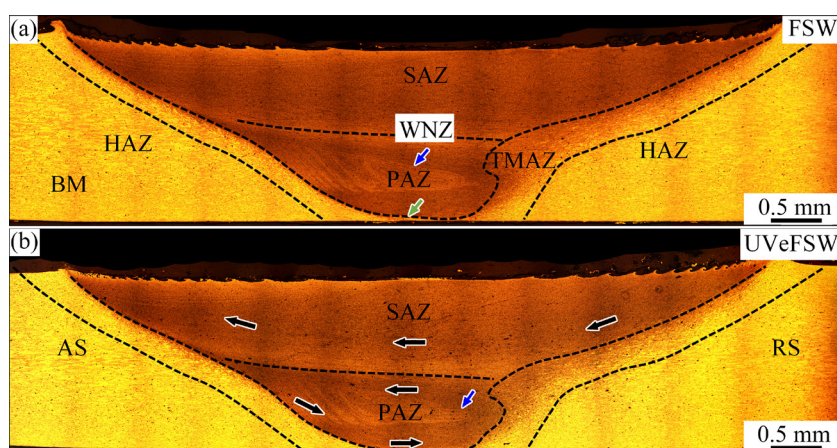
Morphologies of 2195-T6 joints obtained at welding speed of 120 mm/min: (a) FSW; (b) UVeFSW
